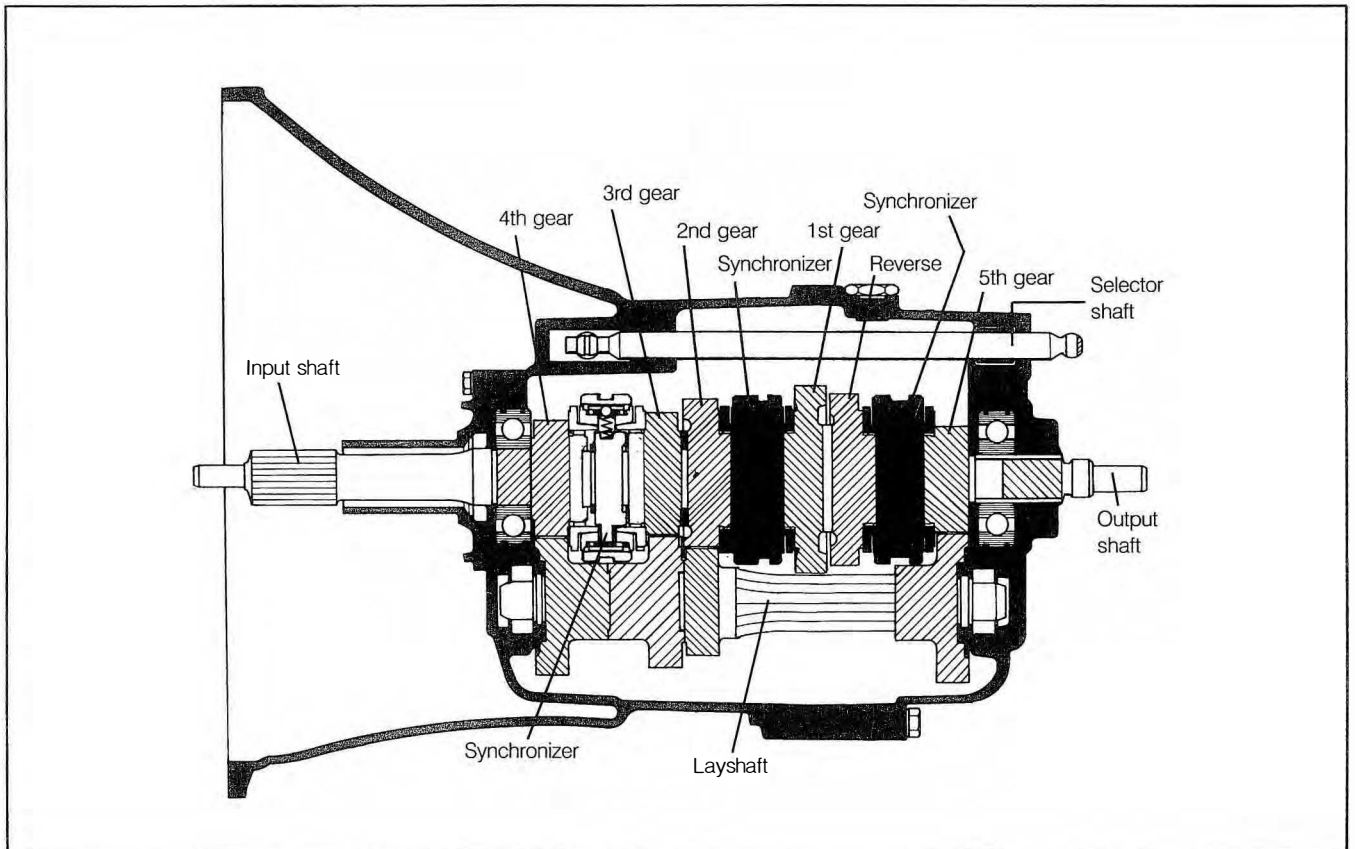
Cross section of manual transmission showing position of gear train.
